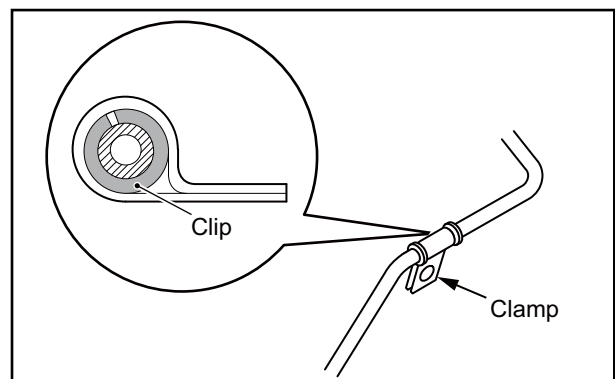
Oil Pipe and Clip - Inspect and Replace
